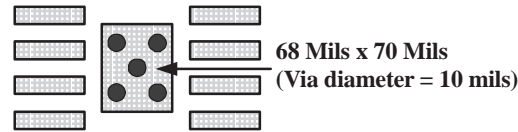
DGN PowerPAD PCB Etch and Via Pattern
